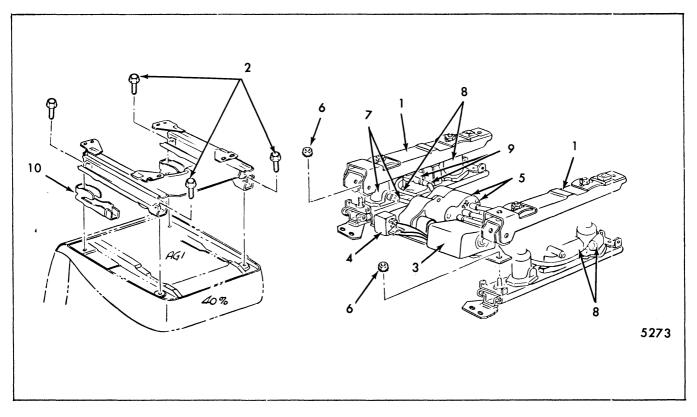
Power Operated Six-Way Seat Adjusters, 60-40, 50-50, 40-40 and Bucket Drivers Seat Shown - Passengers Side Typical
